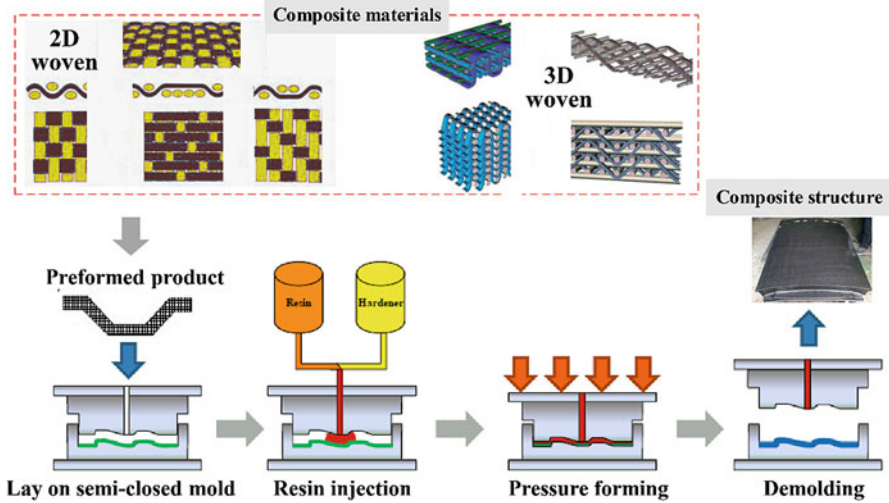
Manufacturing processes to form composite materials into desired shapes
